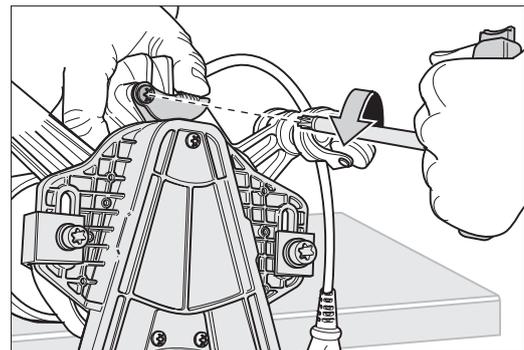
Undo the screw with which the belt tightener plate is fastened.
